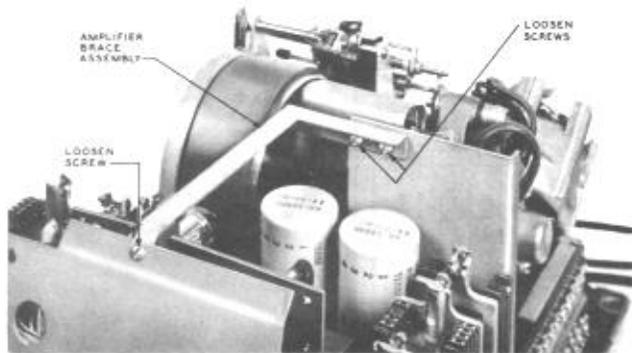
Amplifier Brace Assembly – Standard Sets
